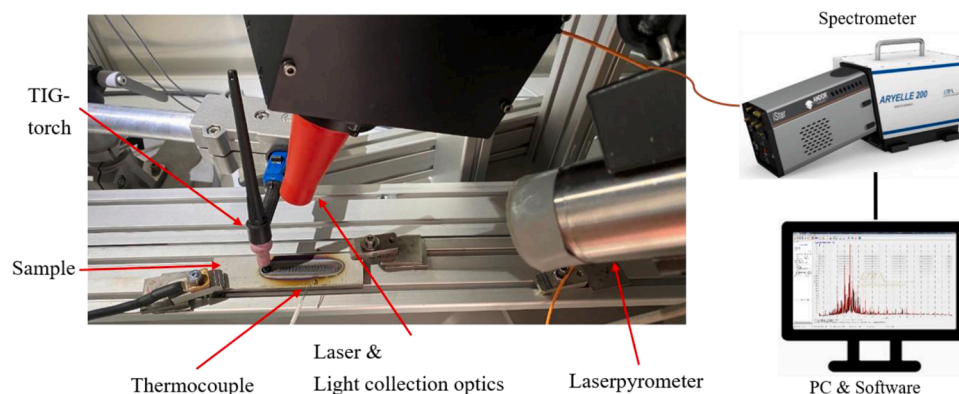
Experimental setup for the *in situ* LIBS measurement during TIG welding.
